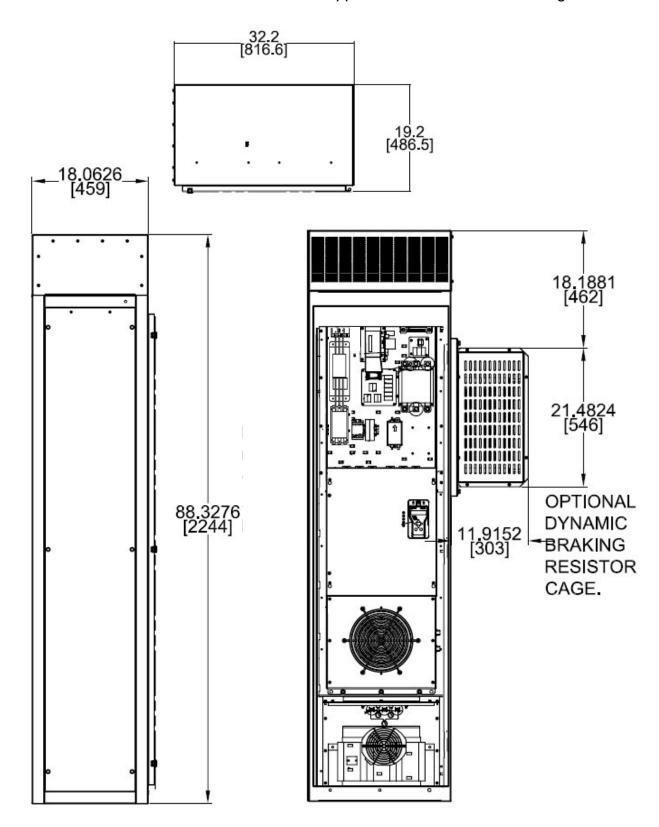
125A unit Dimensions without optional Customer I/O Panel
